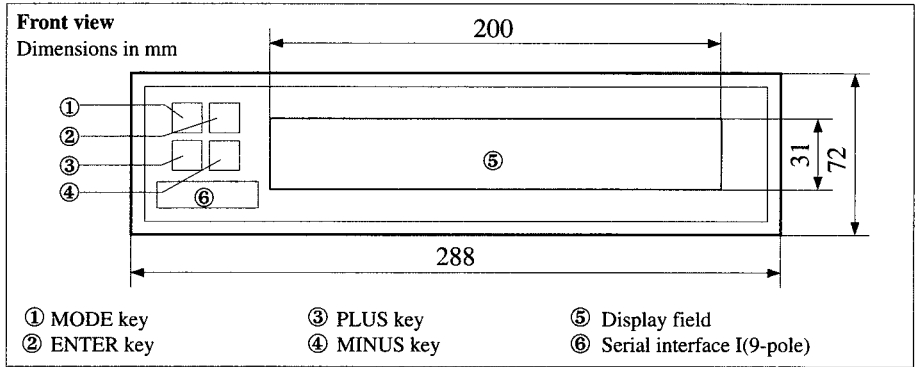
DAA 288-120/240 mounting dimensions, front view
